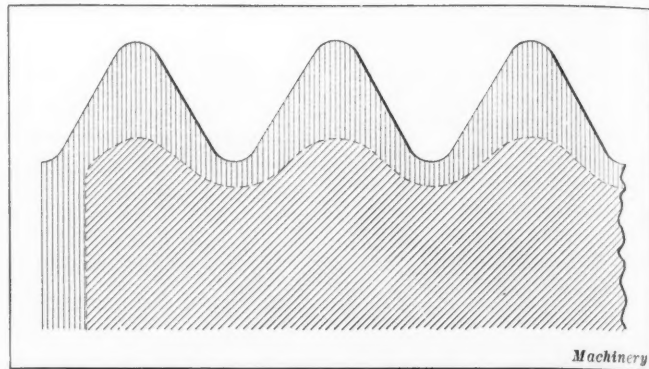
Diagram showing Depth to which Thread Gage is carburized and hardened
